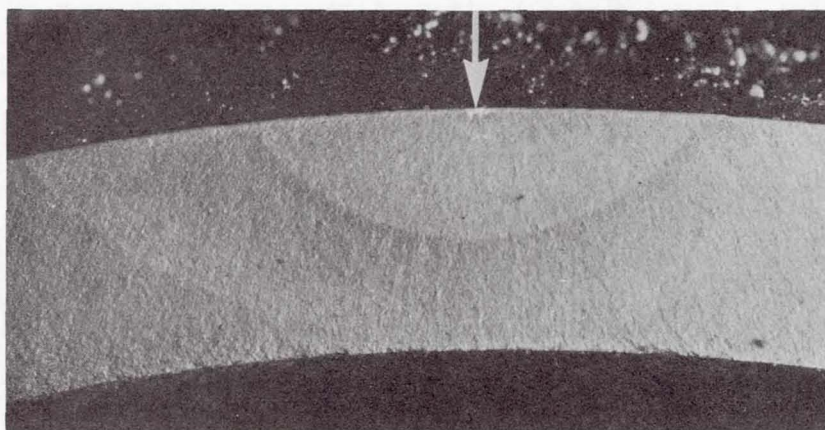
Appearance of the spindle fracture in the vicinity of the fatigue origin (arrow). X 6.
